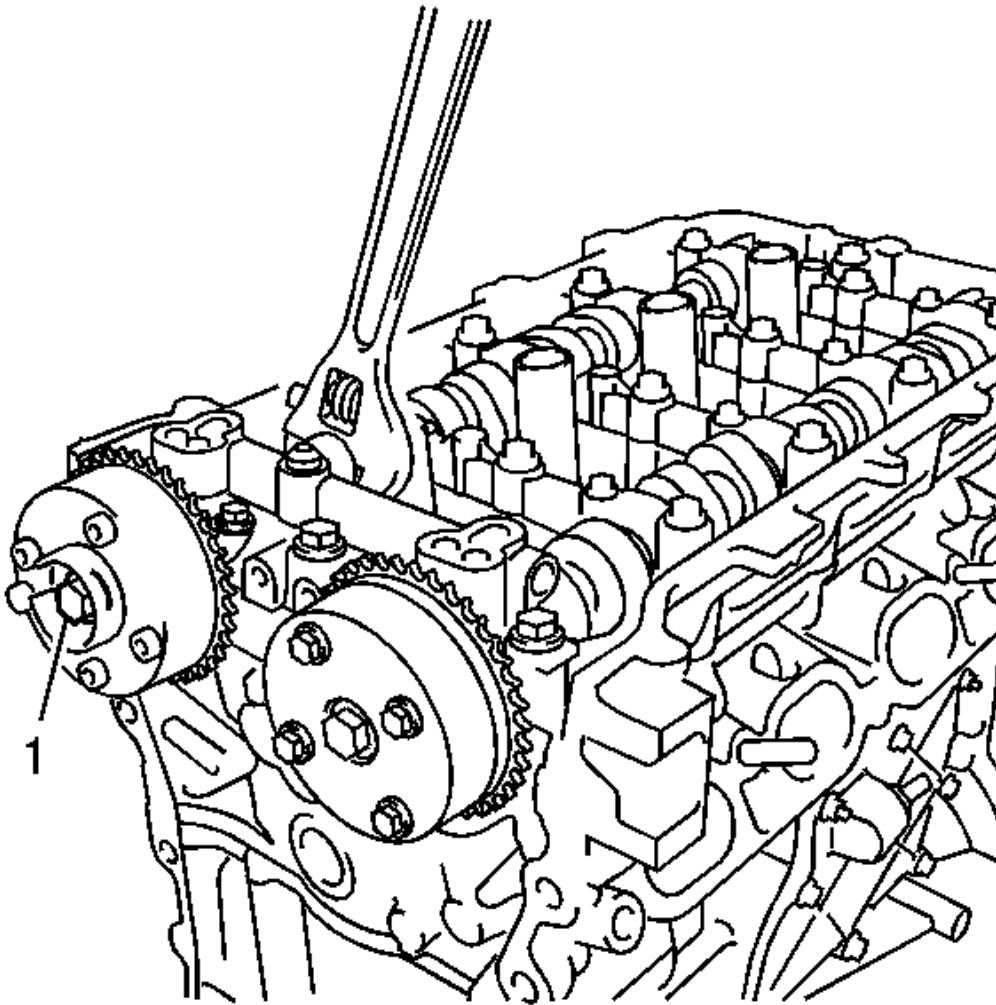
View Of Tightening Flange Bolt With Camshaft Timing Exhaust Gear Fixed
